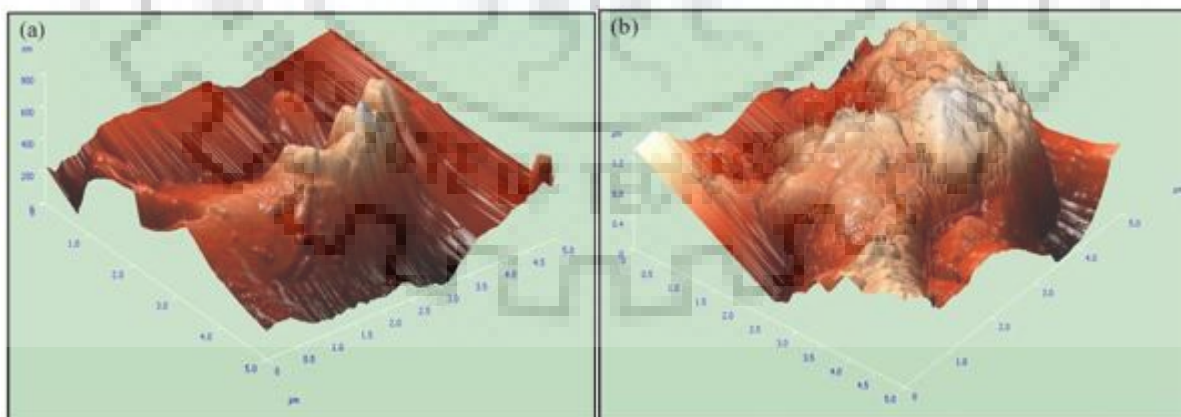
Machined surface roughness using (a) WC tool (b) SS-304 tool
